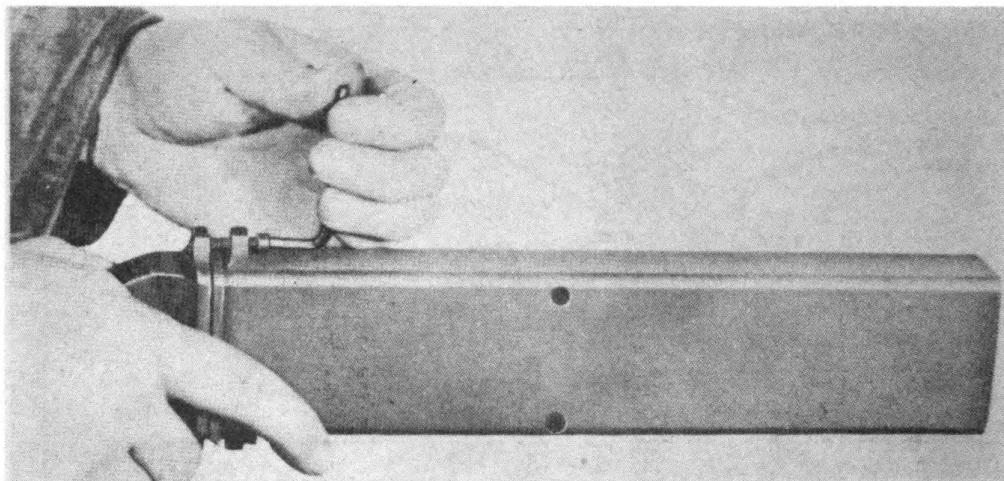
Removing cap screws preparatory to removal of flame shield.
